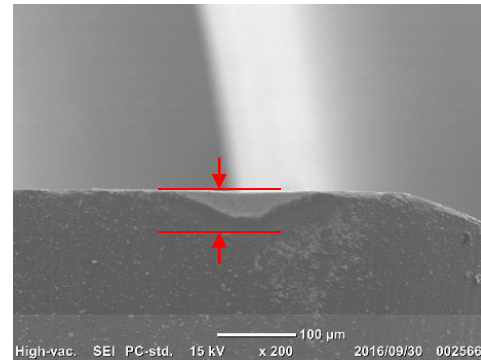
Minimum tool wear at Molybdenum (Cutting depth 0.01)
